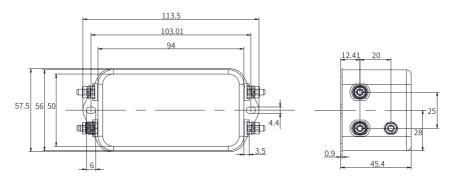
Filter dimensions (FN2010N-30-08) (unit: mm)
